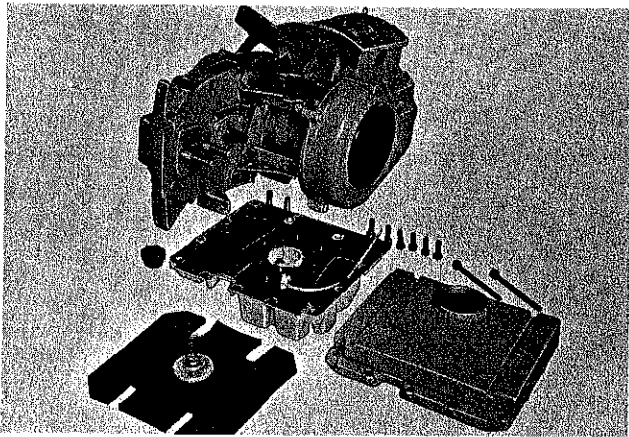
The fuel tank assembly should be removed from the engine, separated into its several parts as illustrated, and thoroughly cleaned. The fuel tank wick, cap, and spring are shown in their working positions.
